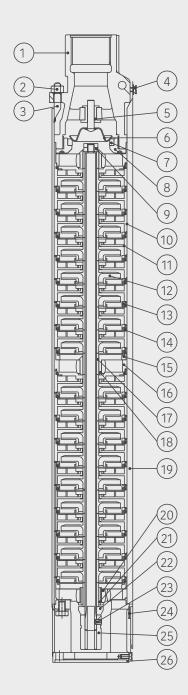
Cross-section view of 4 inch Submersible mixed flow pump
